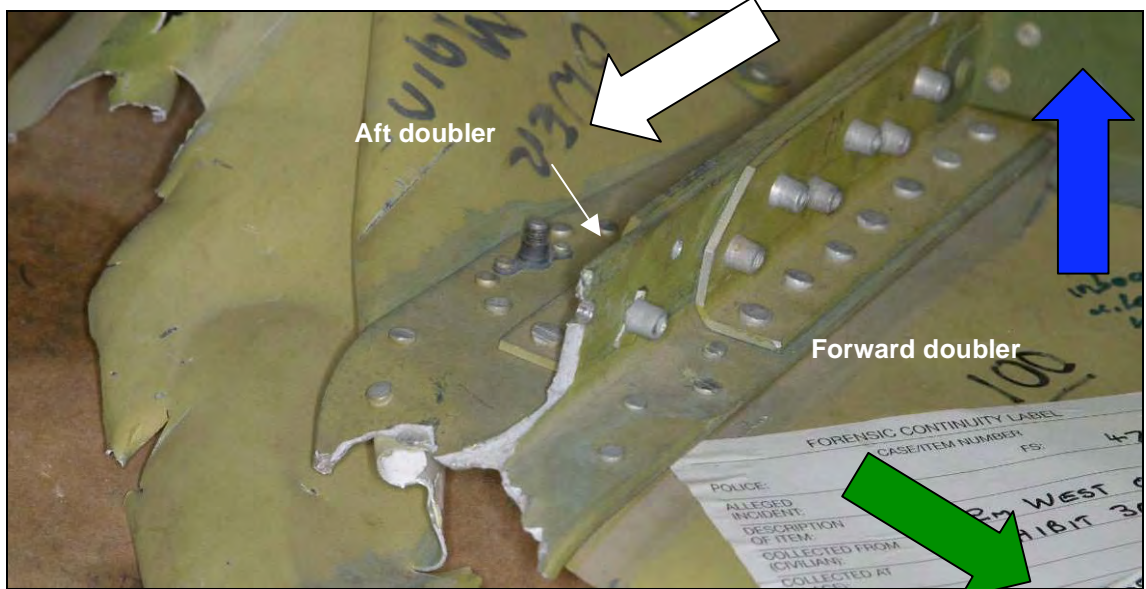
Right main spar upper cap showing fractured aft doubler and outboard extent of rear doubler (nested angle)
